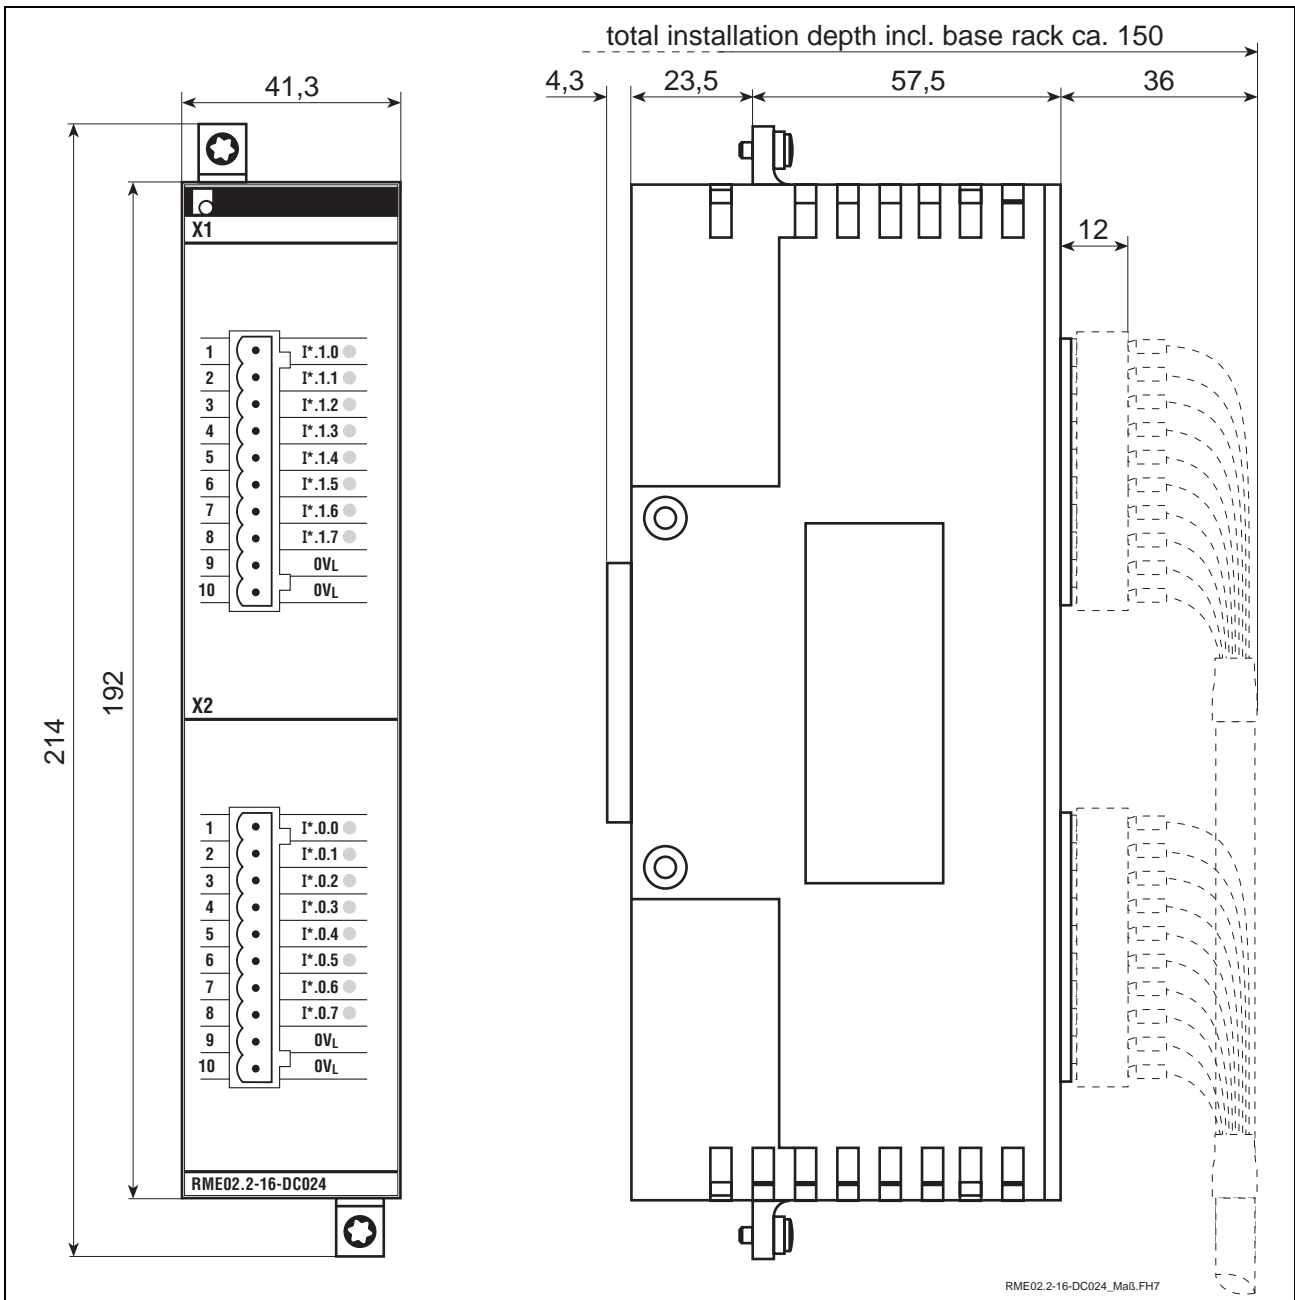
Mounting dimensions of RME02.2-16-DC024
